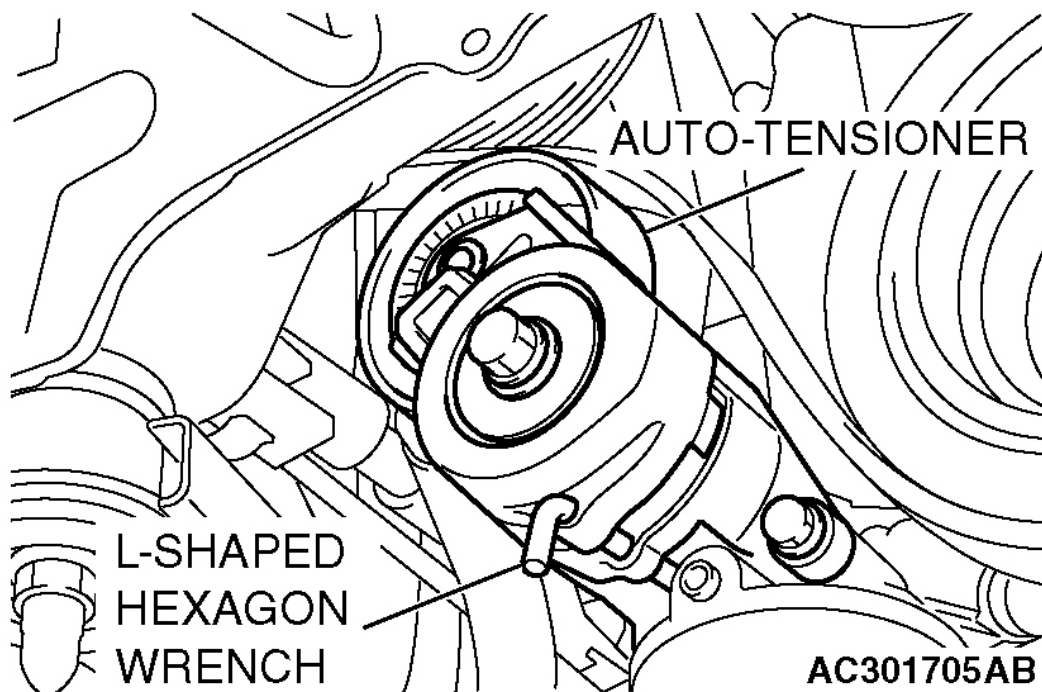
Inserting L-Shaped Hexagon Wrench Into Tensioner Alignment Hole
